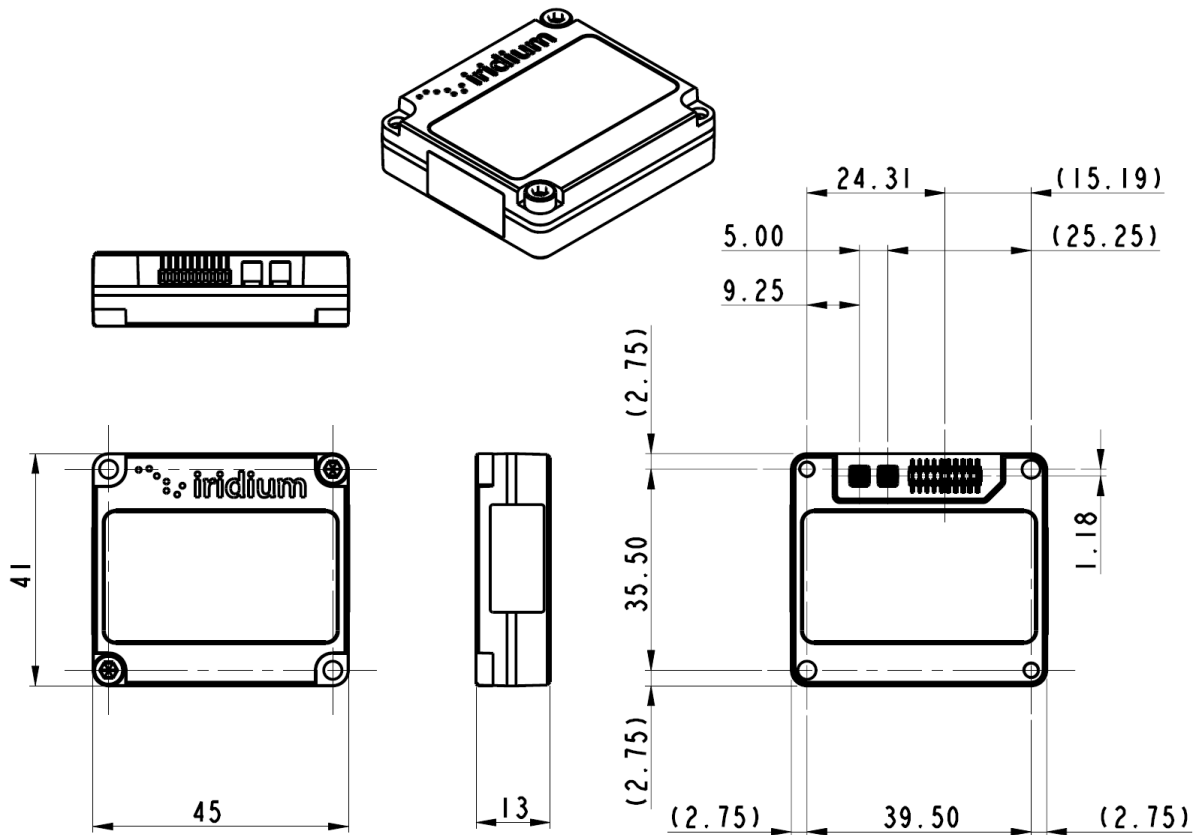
General Assembly and Dimensions of the 9602/9602N SBD Transceiver Module
